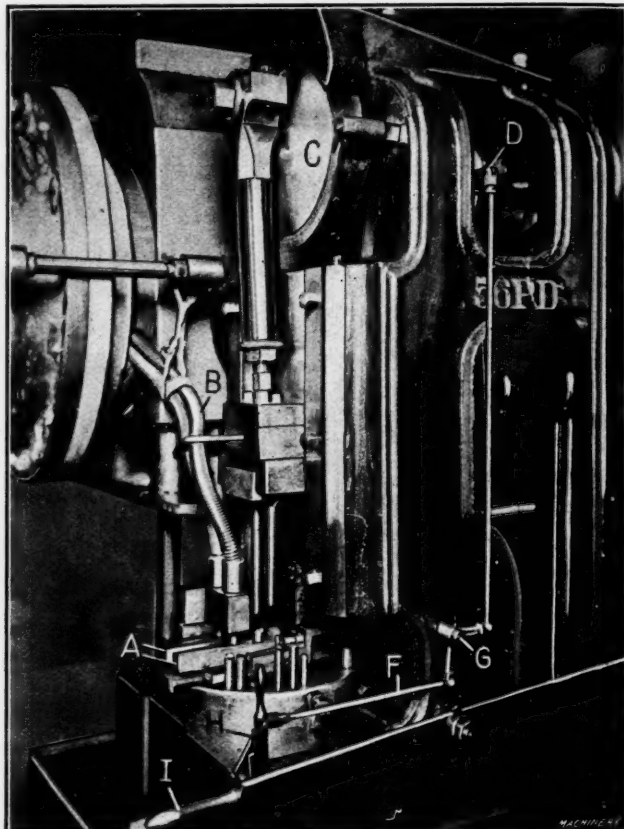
Duplex Drawing Press performing Fourth Redrawing Operation and turning out 10,800 Cups per Hour
